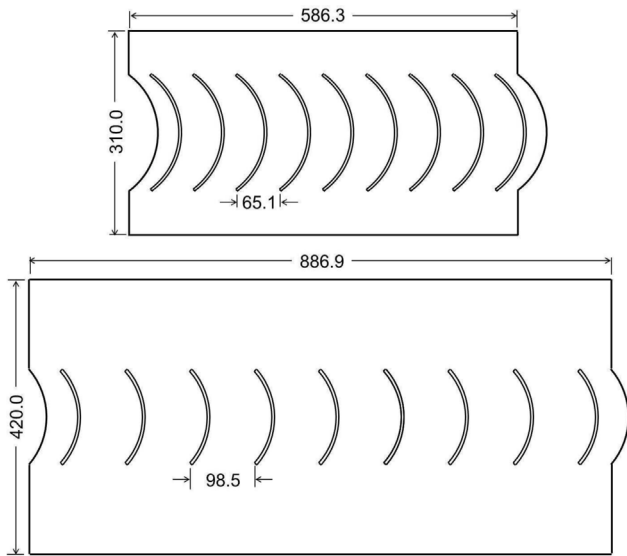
Two-dimensional geometry of hub and casing parts holding 9 guide vanes (dimensions in mm).
